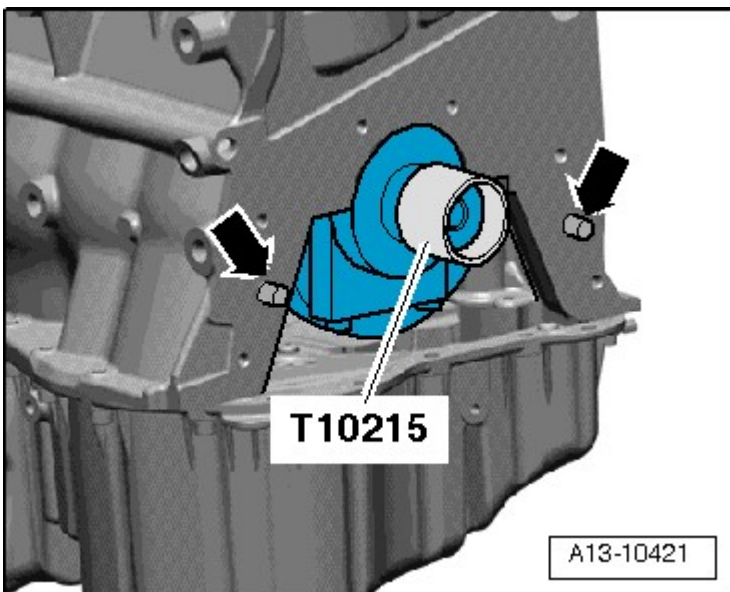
Identifying Installation Of Sealing Flange On Guide Pins -Arrows- On Cylinder Block Using Assembly Tool T10215
